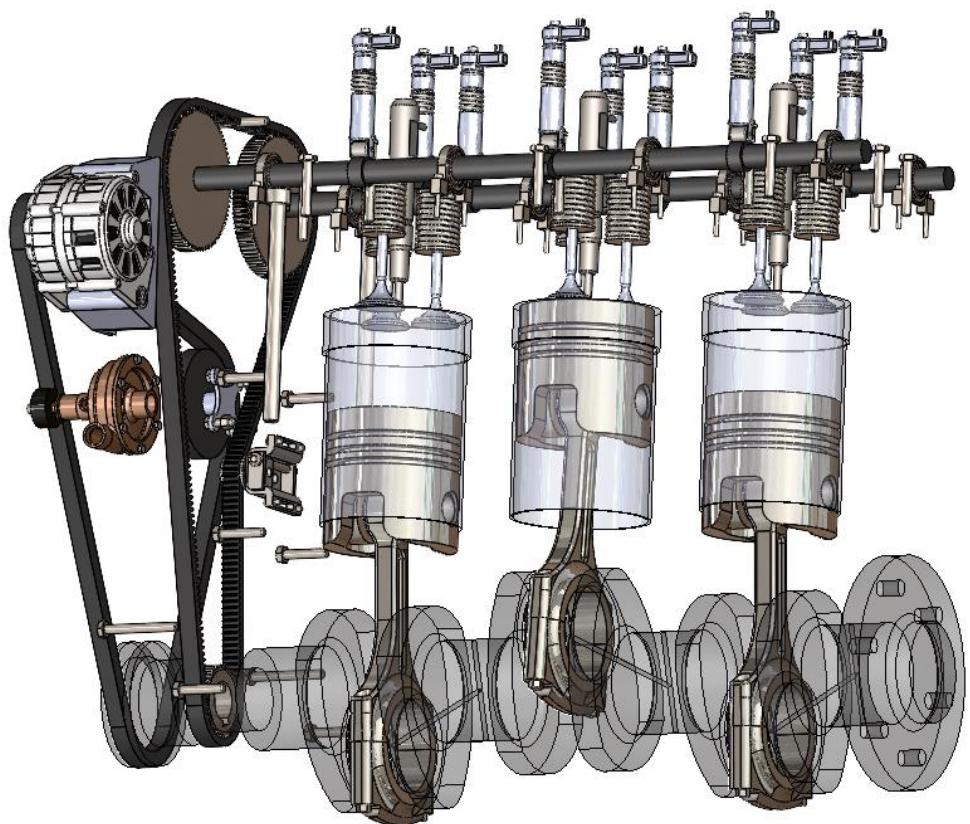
CAD of Crankshaft and Pistons Assembly of The Engine.
